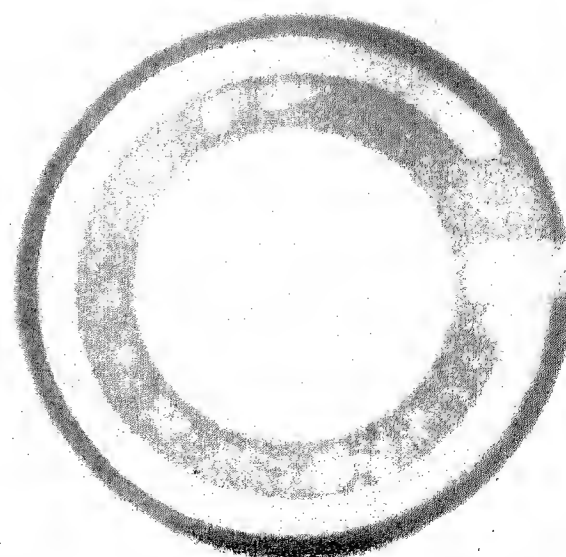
Radiograph by radium of zinc alloy rings, showing porosity.
